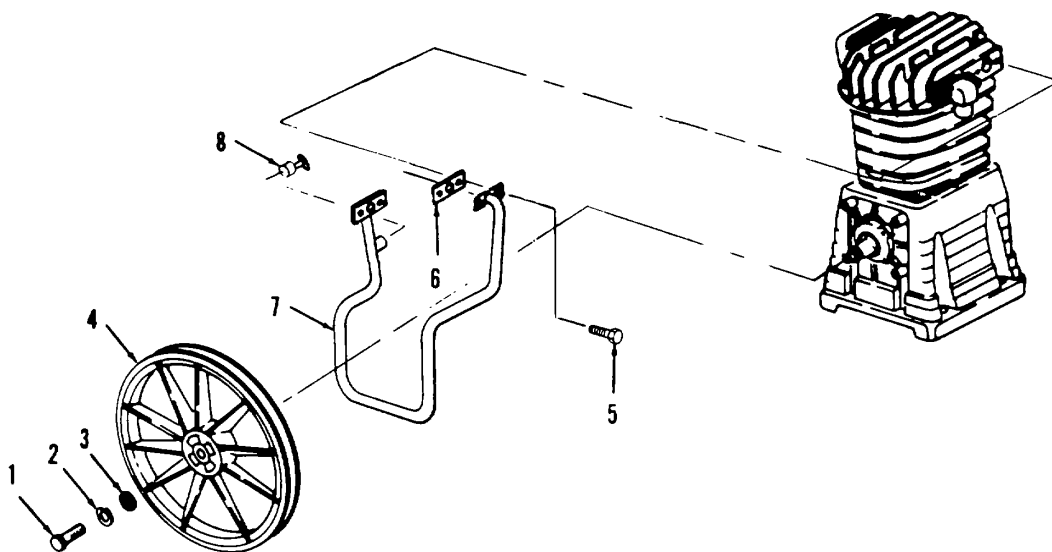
Flywheel and Intercooler Tube Repair and Replacement.
